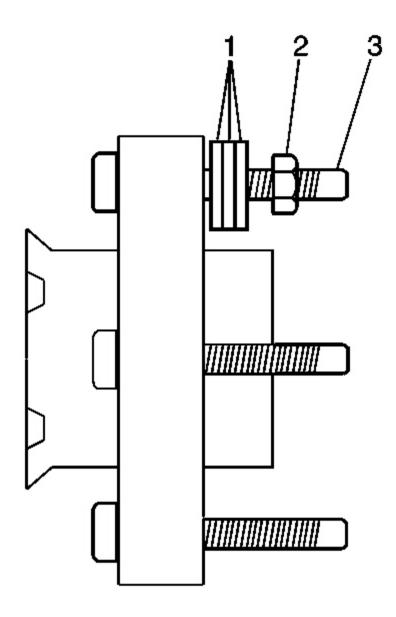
Removing The Wheel Stud From The Axle Flange Courtesy of GENERAL MOTORS CORP.
